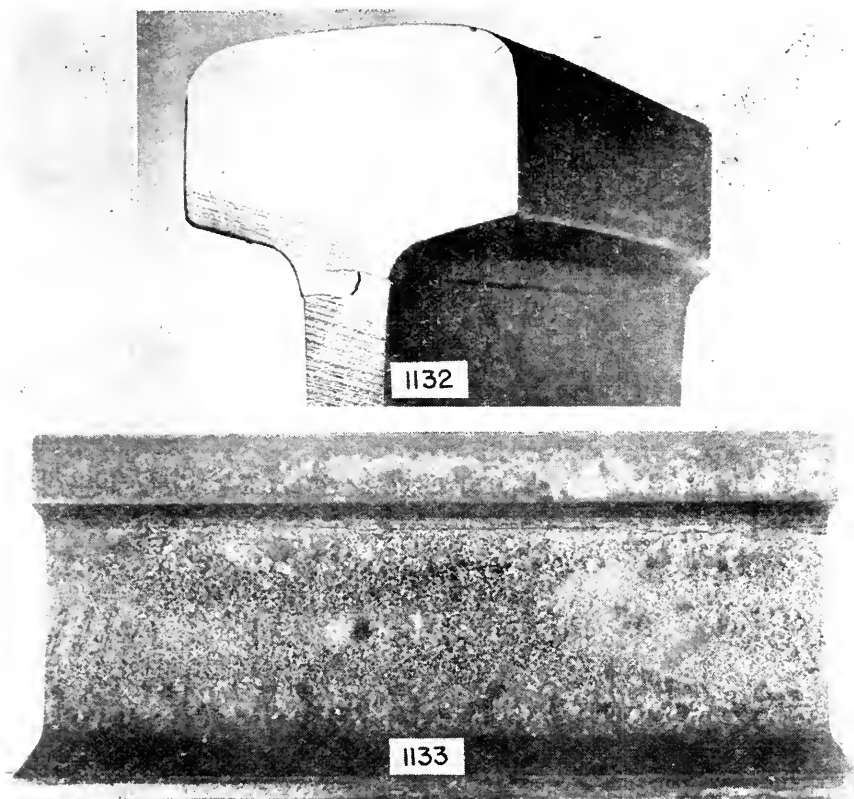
Fillet cracks in flame-hardened rails. Developed in cradle rolling machine.
